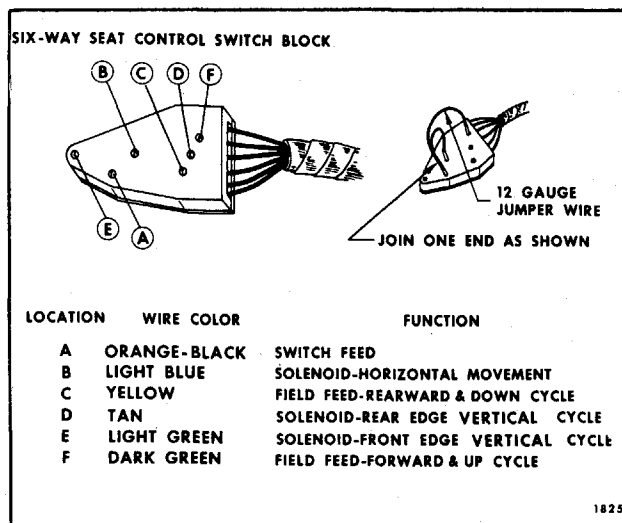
Six-Way Seat Switch Block in Seat Side Panel
